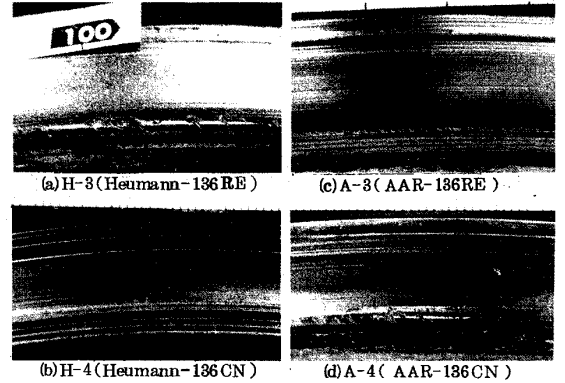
Surface appearance and contact fatigue cracks at gauge corner of gauge specimens.
